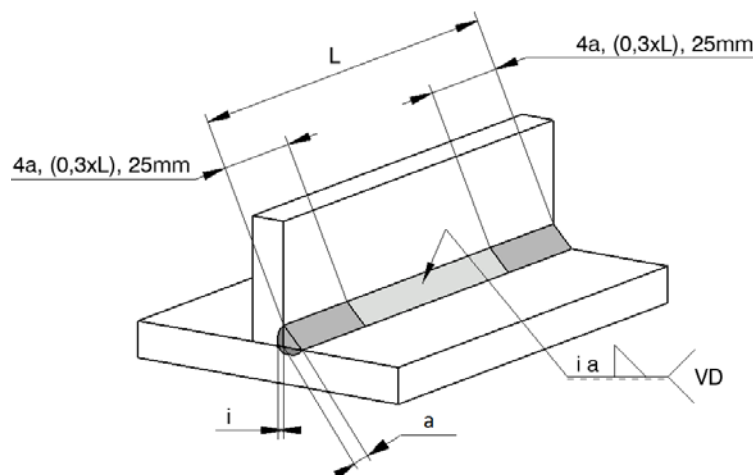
A deviation of the i-dimension is only permitted if it is located at the ends of a fillet weld
